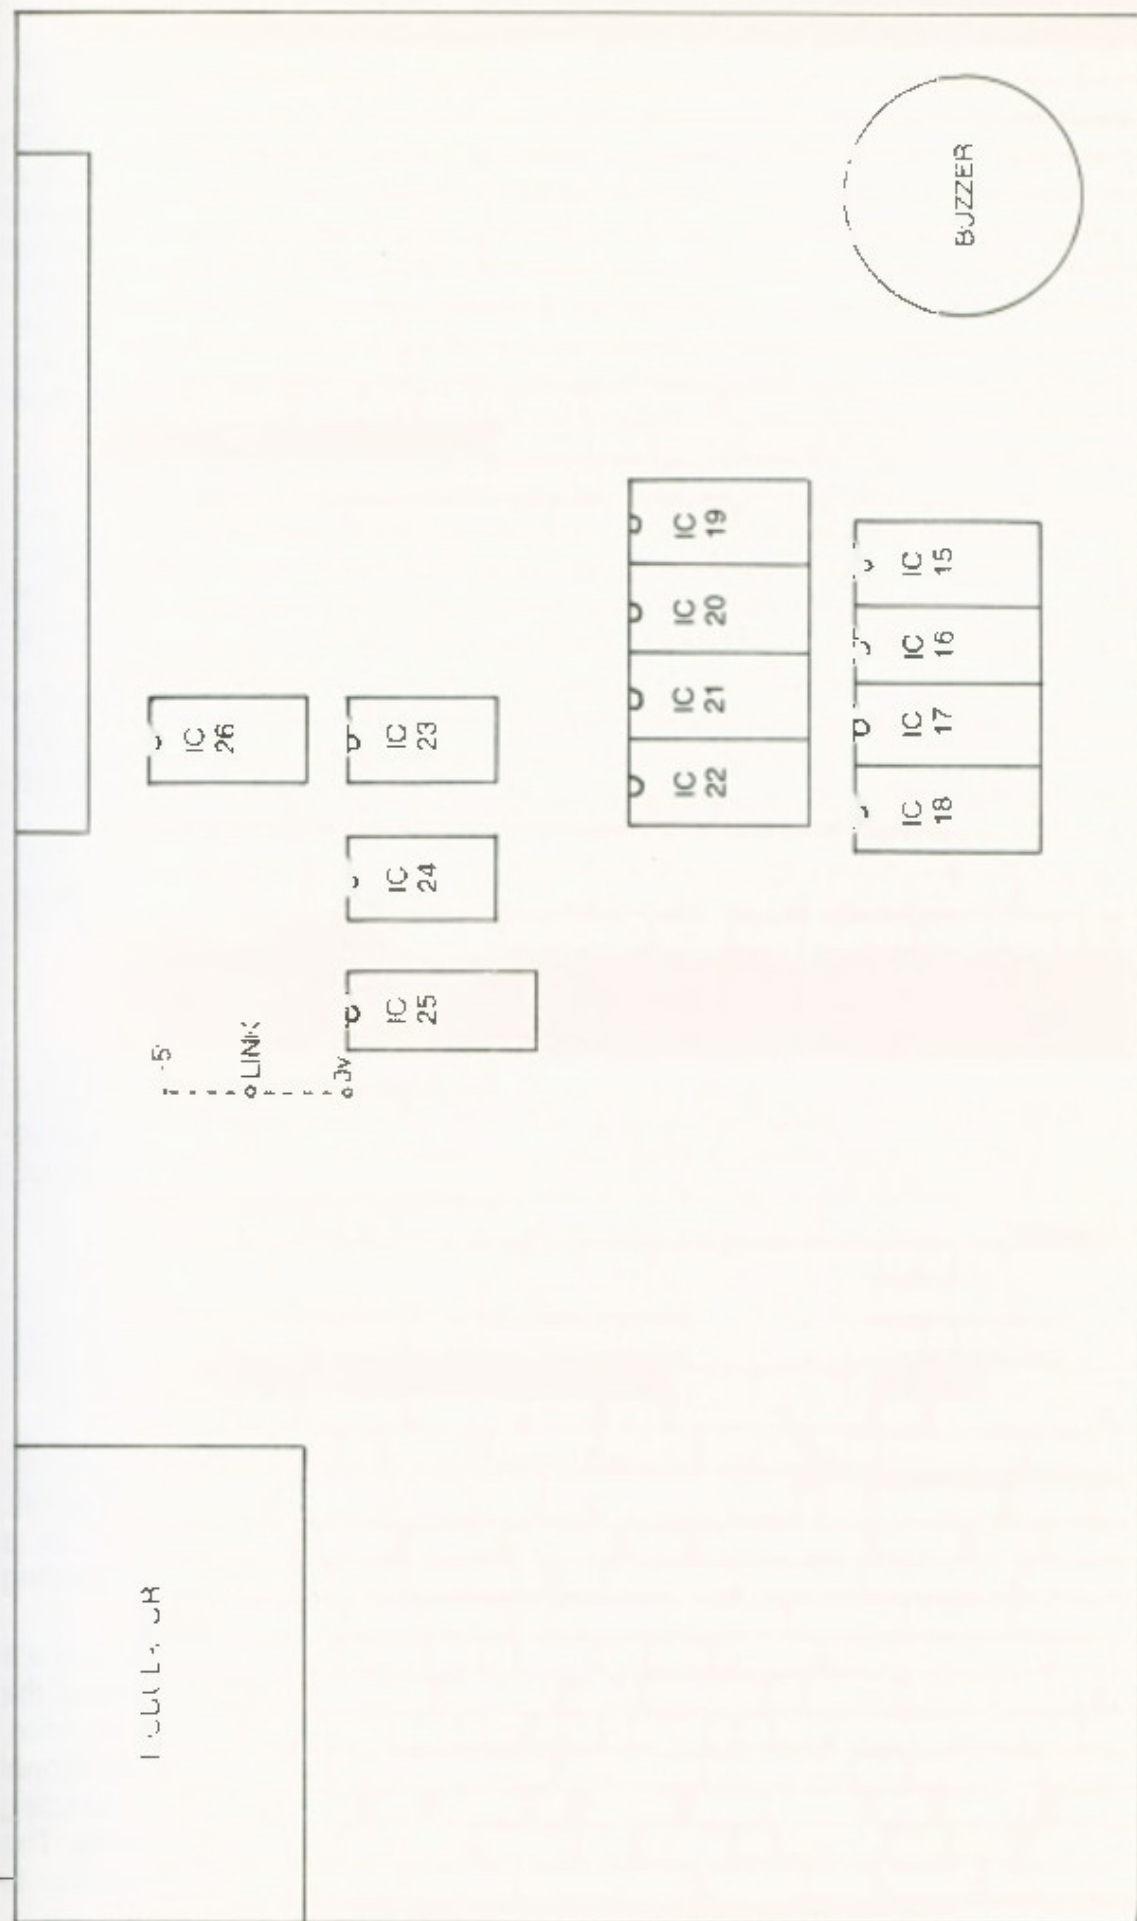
ISSUE 2 BOARD SHOWING POSITION OF MEMORY EXPANSION SOCKETS
